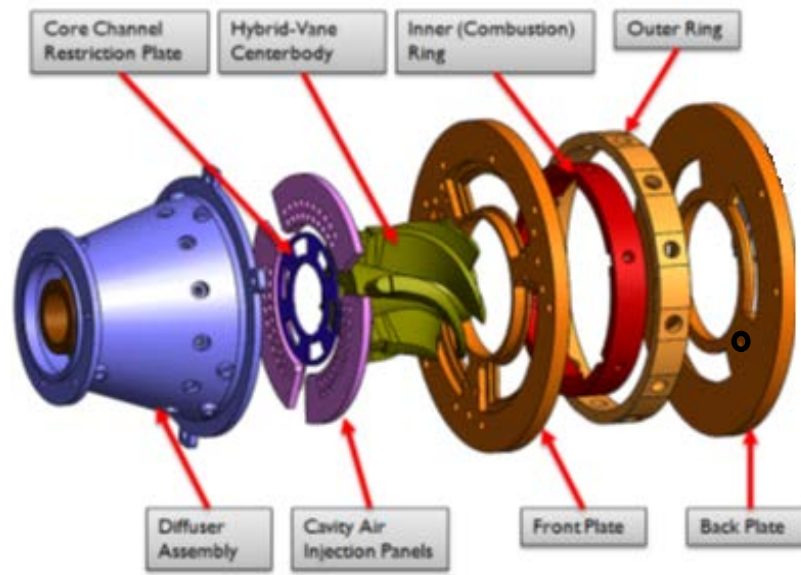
Part breakout and exploded view of AFIT UCC v2 combustion chamber [6]
